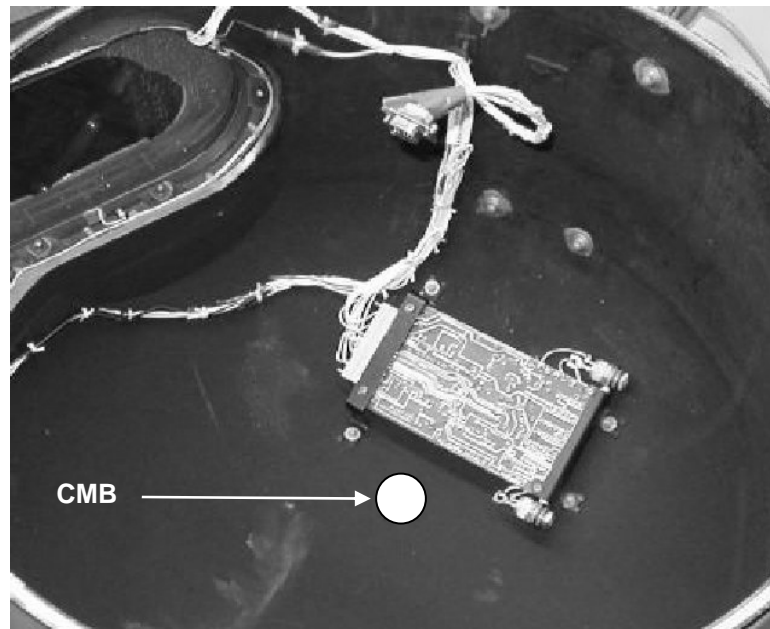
Day Shroud Assembly (AH-64A/D) CMB Location
